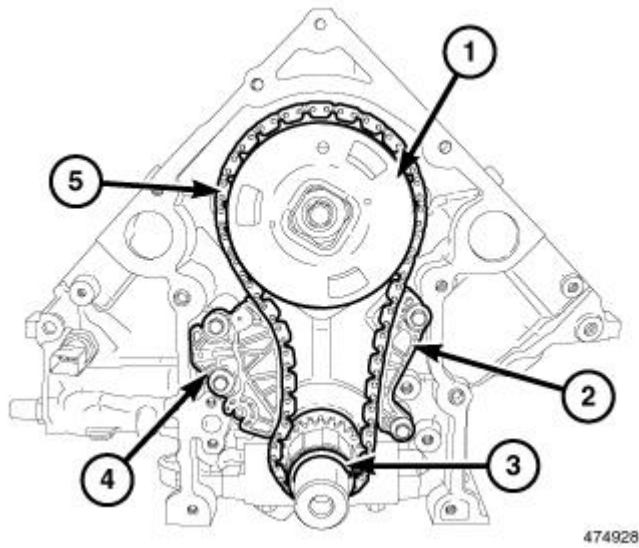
Timing Chain, Sprockets, Timing Chain Tensioner & Guide
